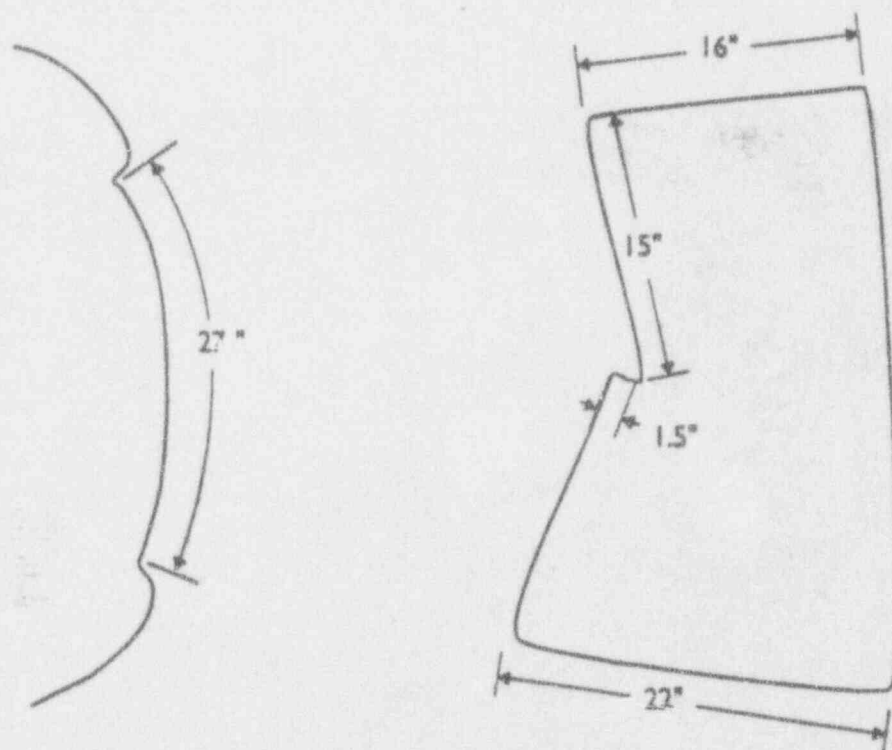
Top View of Metal Jacket Section 2 after Test 3
